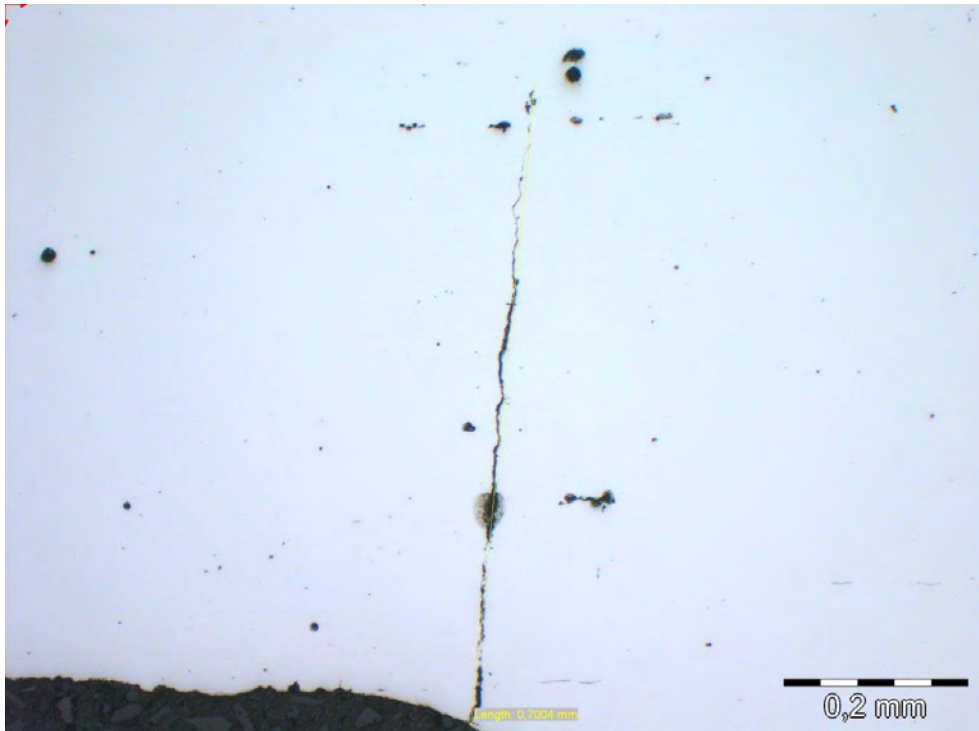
Crack at segment B, first ridge on barrel no. SFK 0123-A
